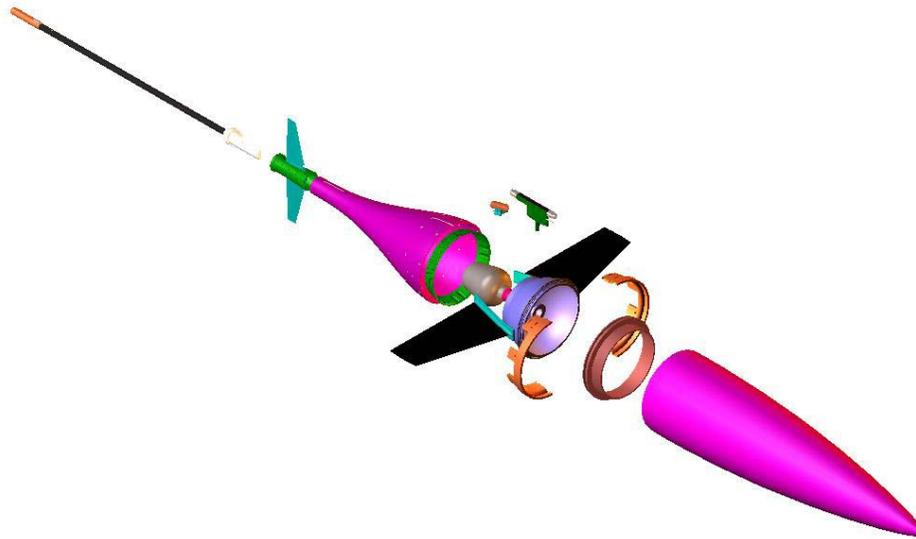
Deepglider schematic, exploded view, illustrating a composite hull with the shape of the Seaglider forward fairing.
